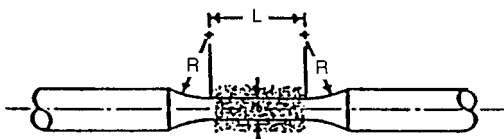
Bending Fatigue Specimen With Tangentially Blending Fillets Between the Test Section and the Ends for Rotating Beam or Axial Loading
